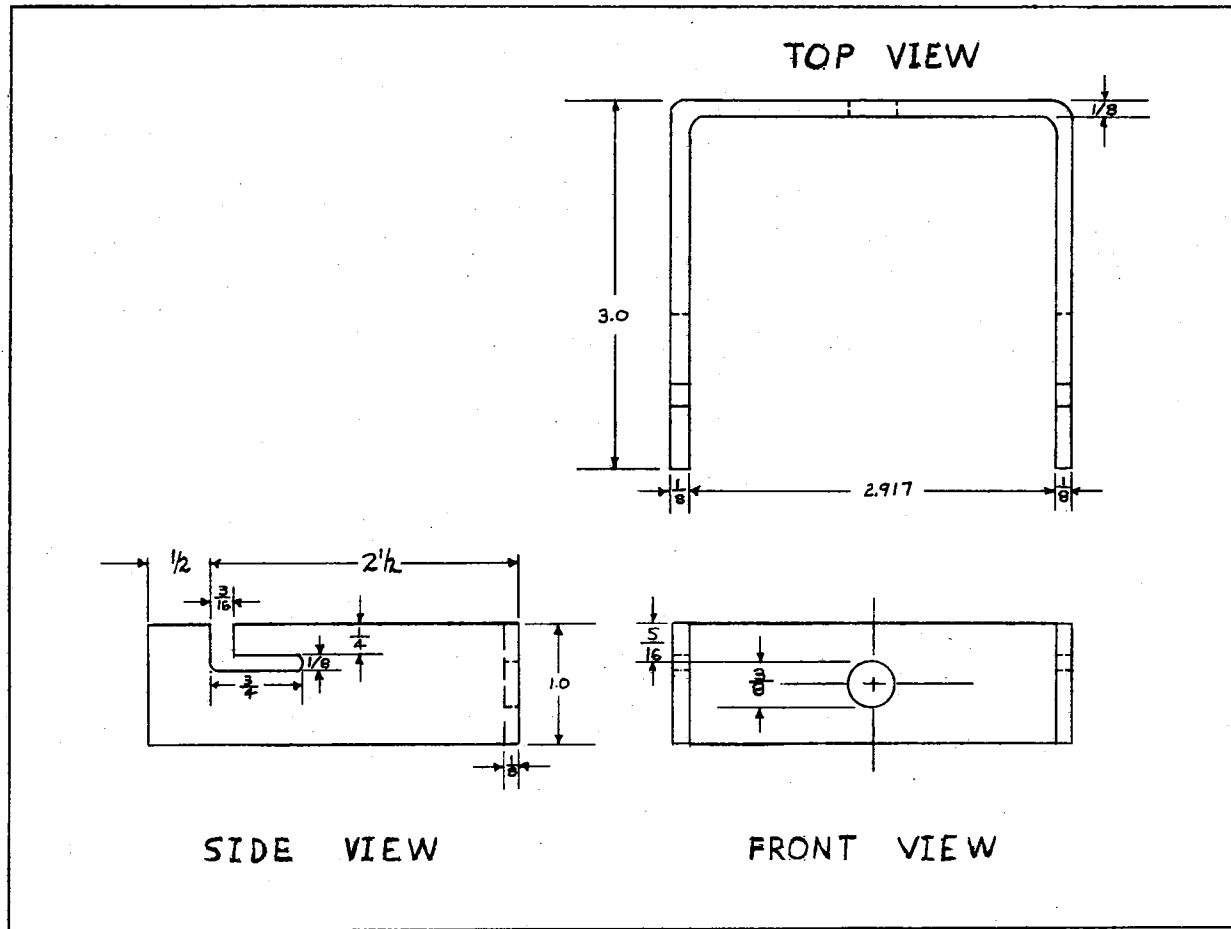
Detailed Dimensioned Drawing of the Hanging Rack for the 100 ml Evaporative Dosimeter
